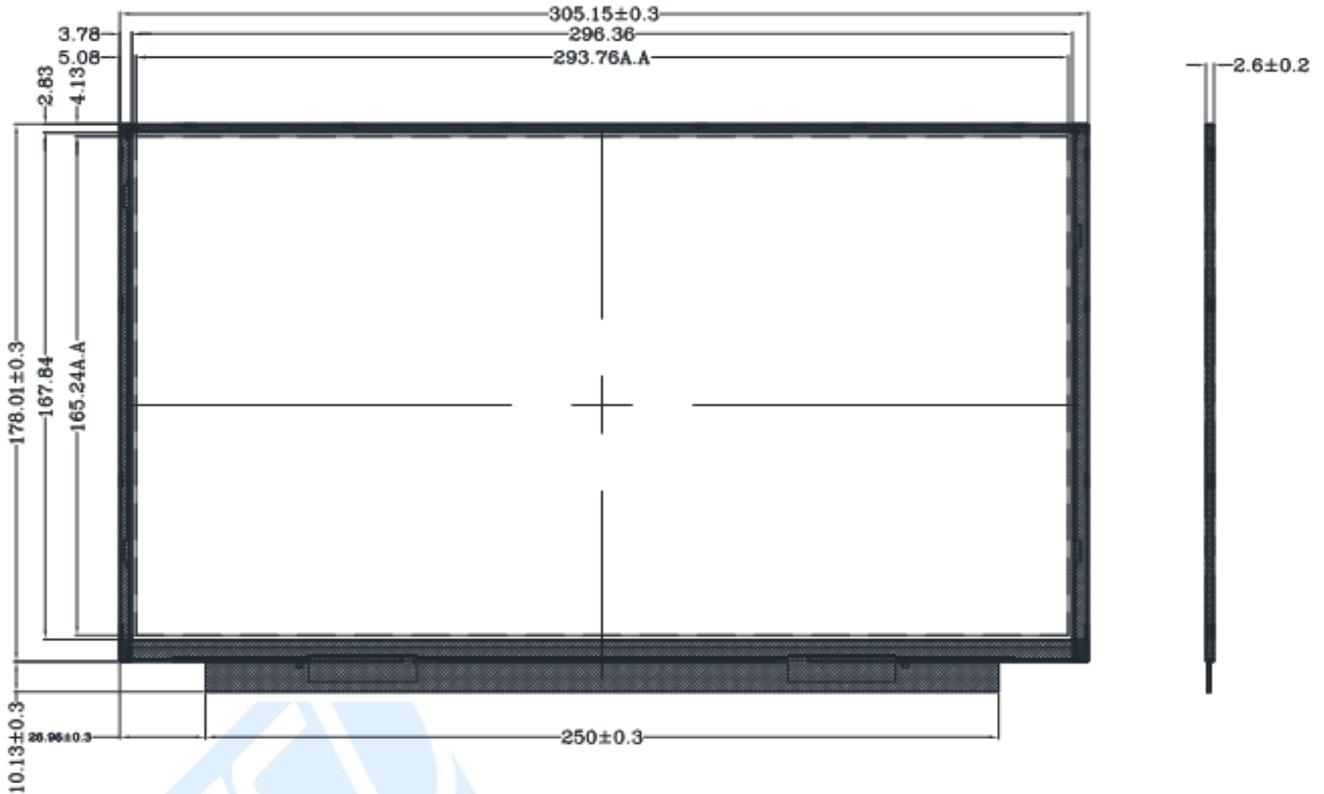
TFT-LCD LCM Outline Dimension (Front View)
